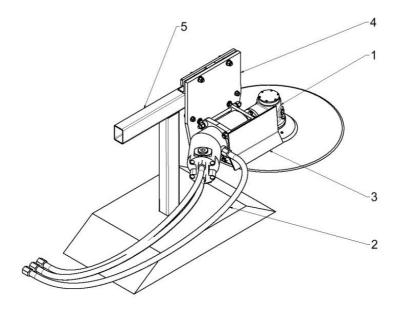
Laboratory set of mechanical pruner design: 1 – rear transmission with axial piston hydromotor, 2 – hydraulic lines, 3 – little plough blade, 4 – clamping plate, 5 – frame for laboratory measurement.
